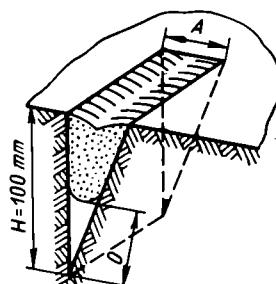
Mold for casting a wedge-shaped chill-test specimen
